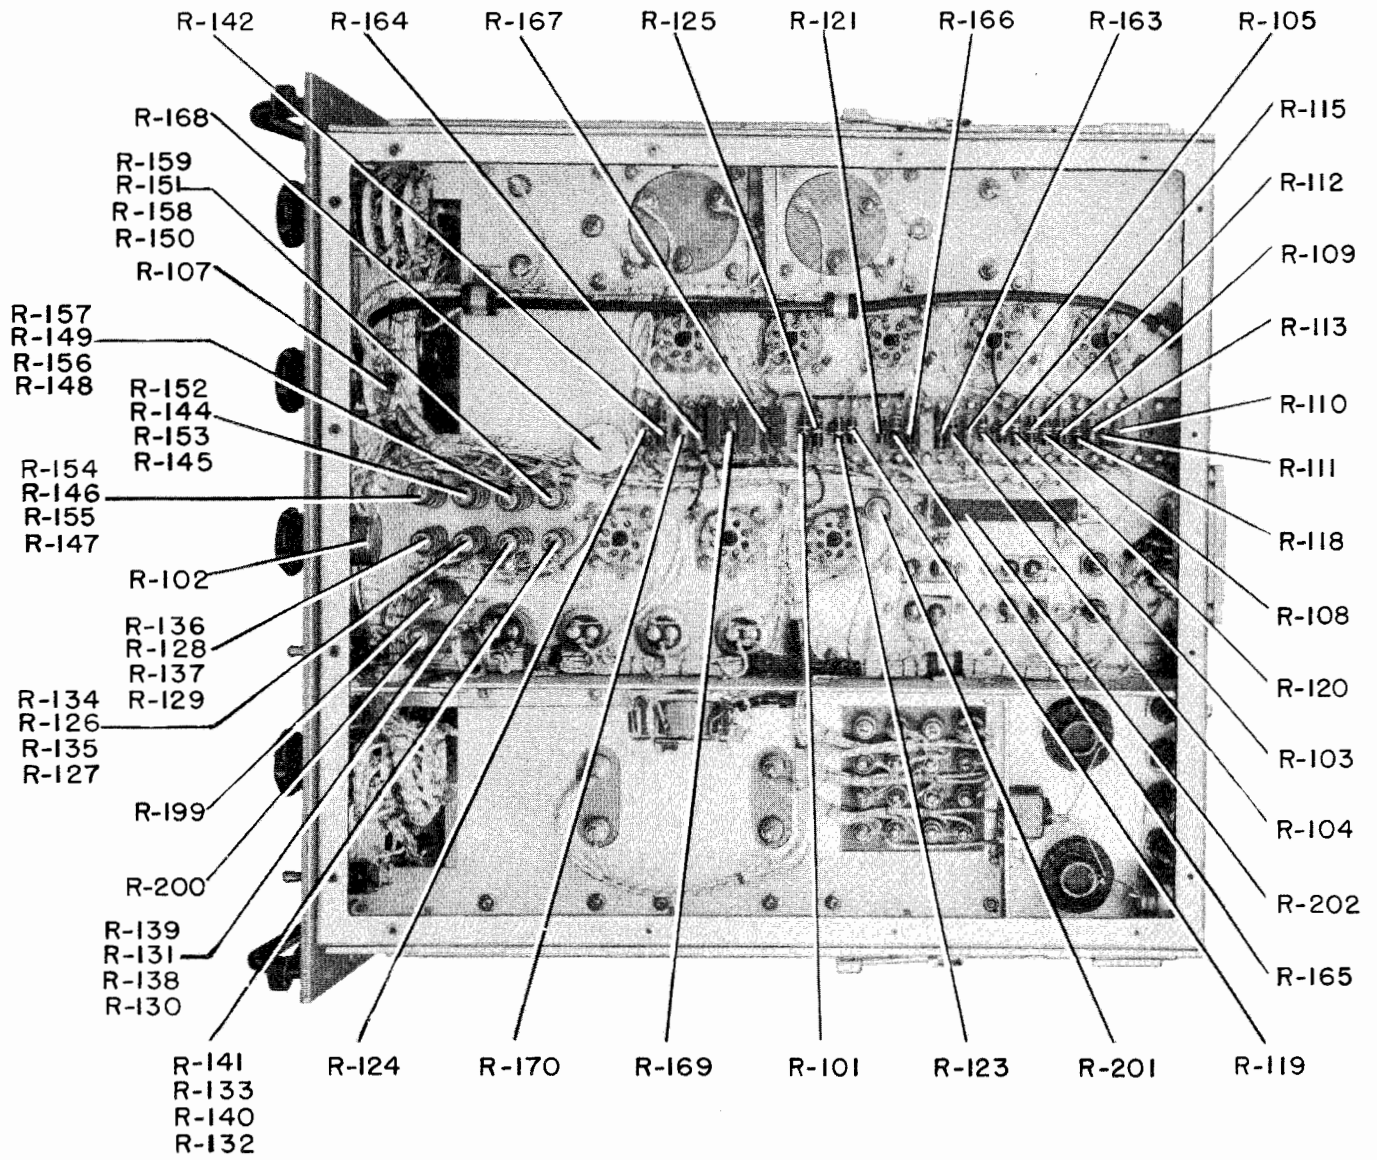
Resistor Locations, Bottom View of Modulator-Power Supply MD-165/URT
